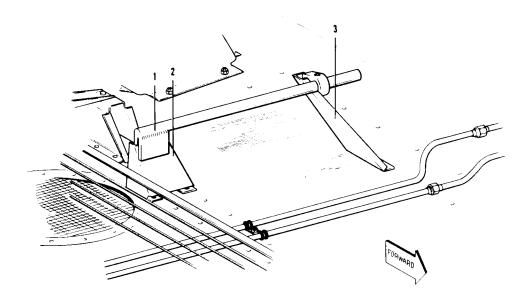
Checking Aligning Brackets of Gear Back-Up Extender Actuator
